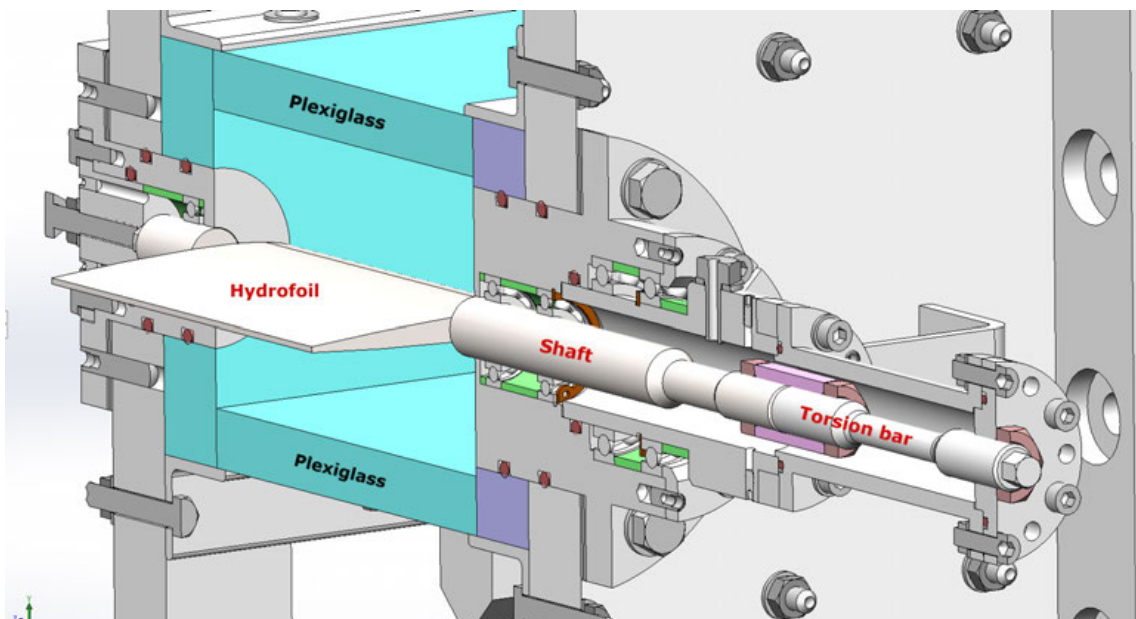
Mounting of the hydrofoil inside the test section [66]
